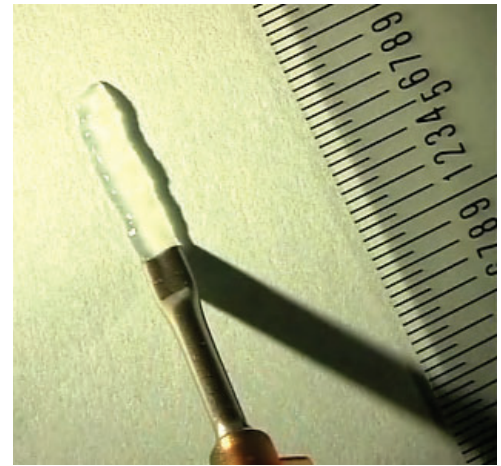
Oval or flattened tube-type tip used to apply larger ribbons of more viscous fluids. Scale shows 0.5 mm increments.
